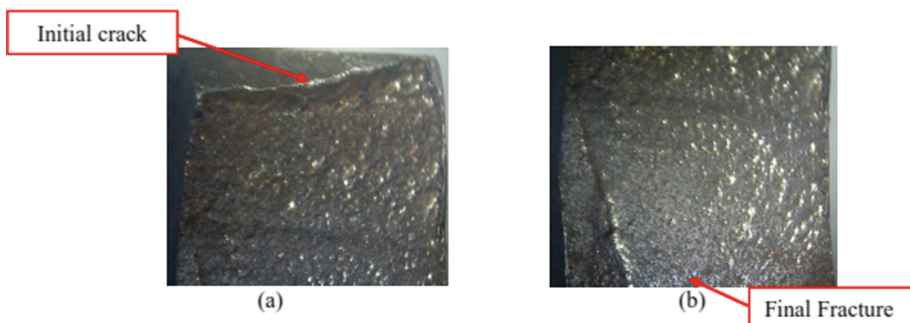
(a) Enlargement of Crack Initiation, (b) Enlargement of the Final Fracture Area
